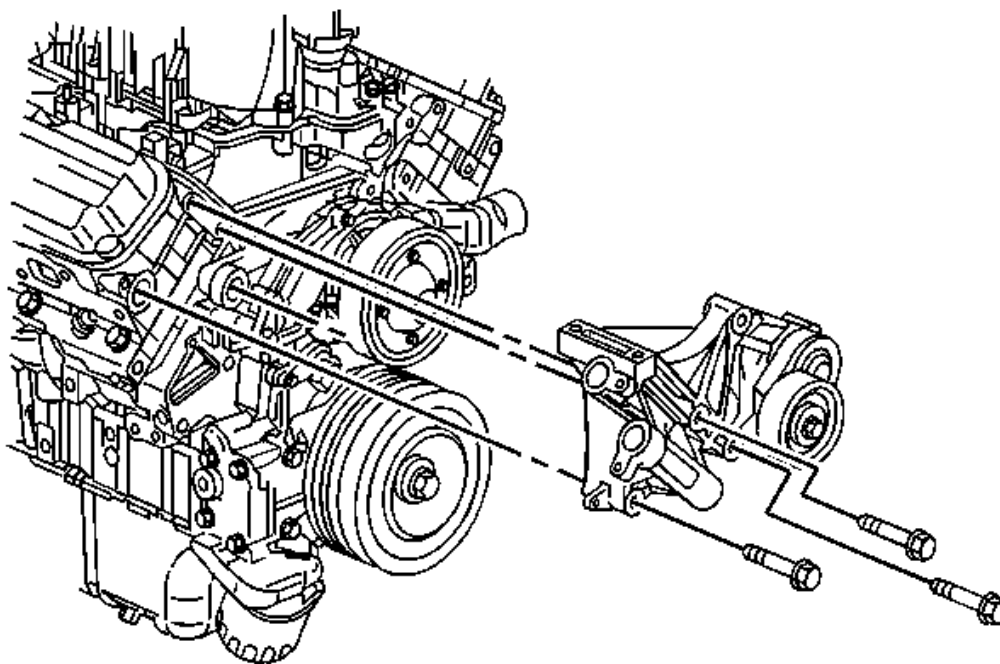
View of Drive Belt Tensioner Bolts & Drive Belt Tensioner
